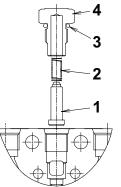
Check valve section (P3 Inlet, Travel, and Anti-drift Valve Sections)
